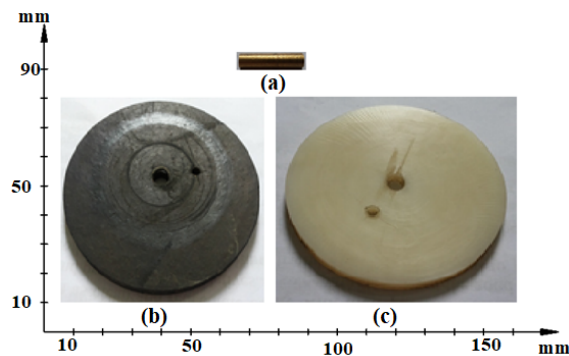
Image of fabricated specimens (a) Copper pin, (b) Rubber disc, (c) Capron disc
